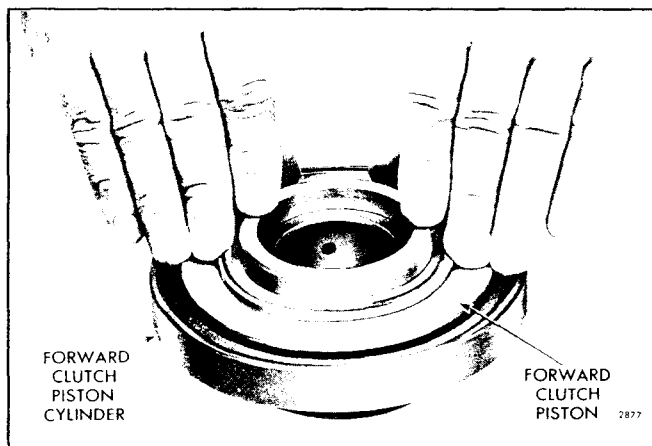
Installing Forward Clutch Piston in Clutch Piston Cylinder
